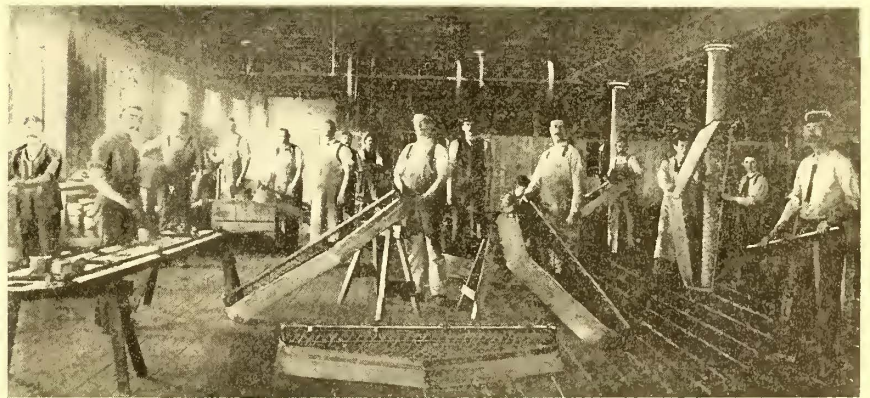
FENDER DEPARTMENT—STERLING SUPPLY & MANUFACTURING CO.
